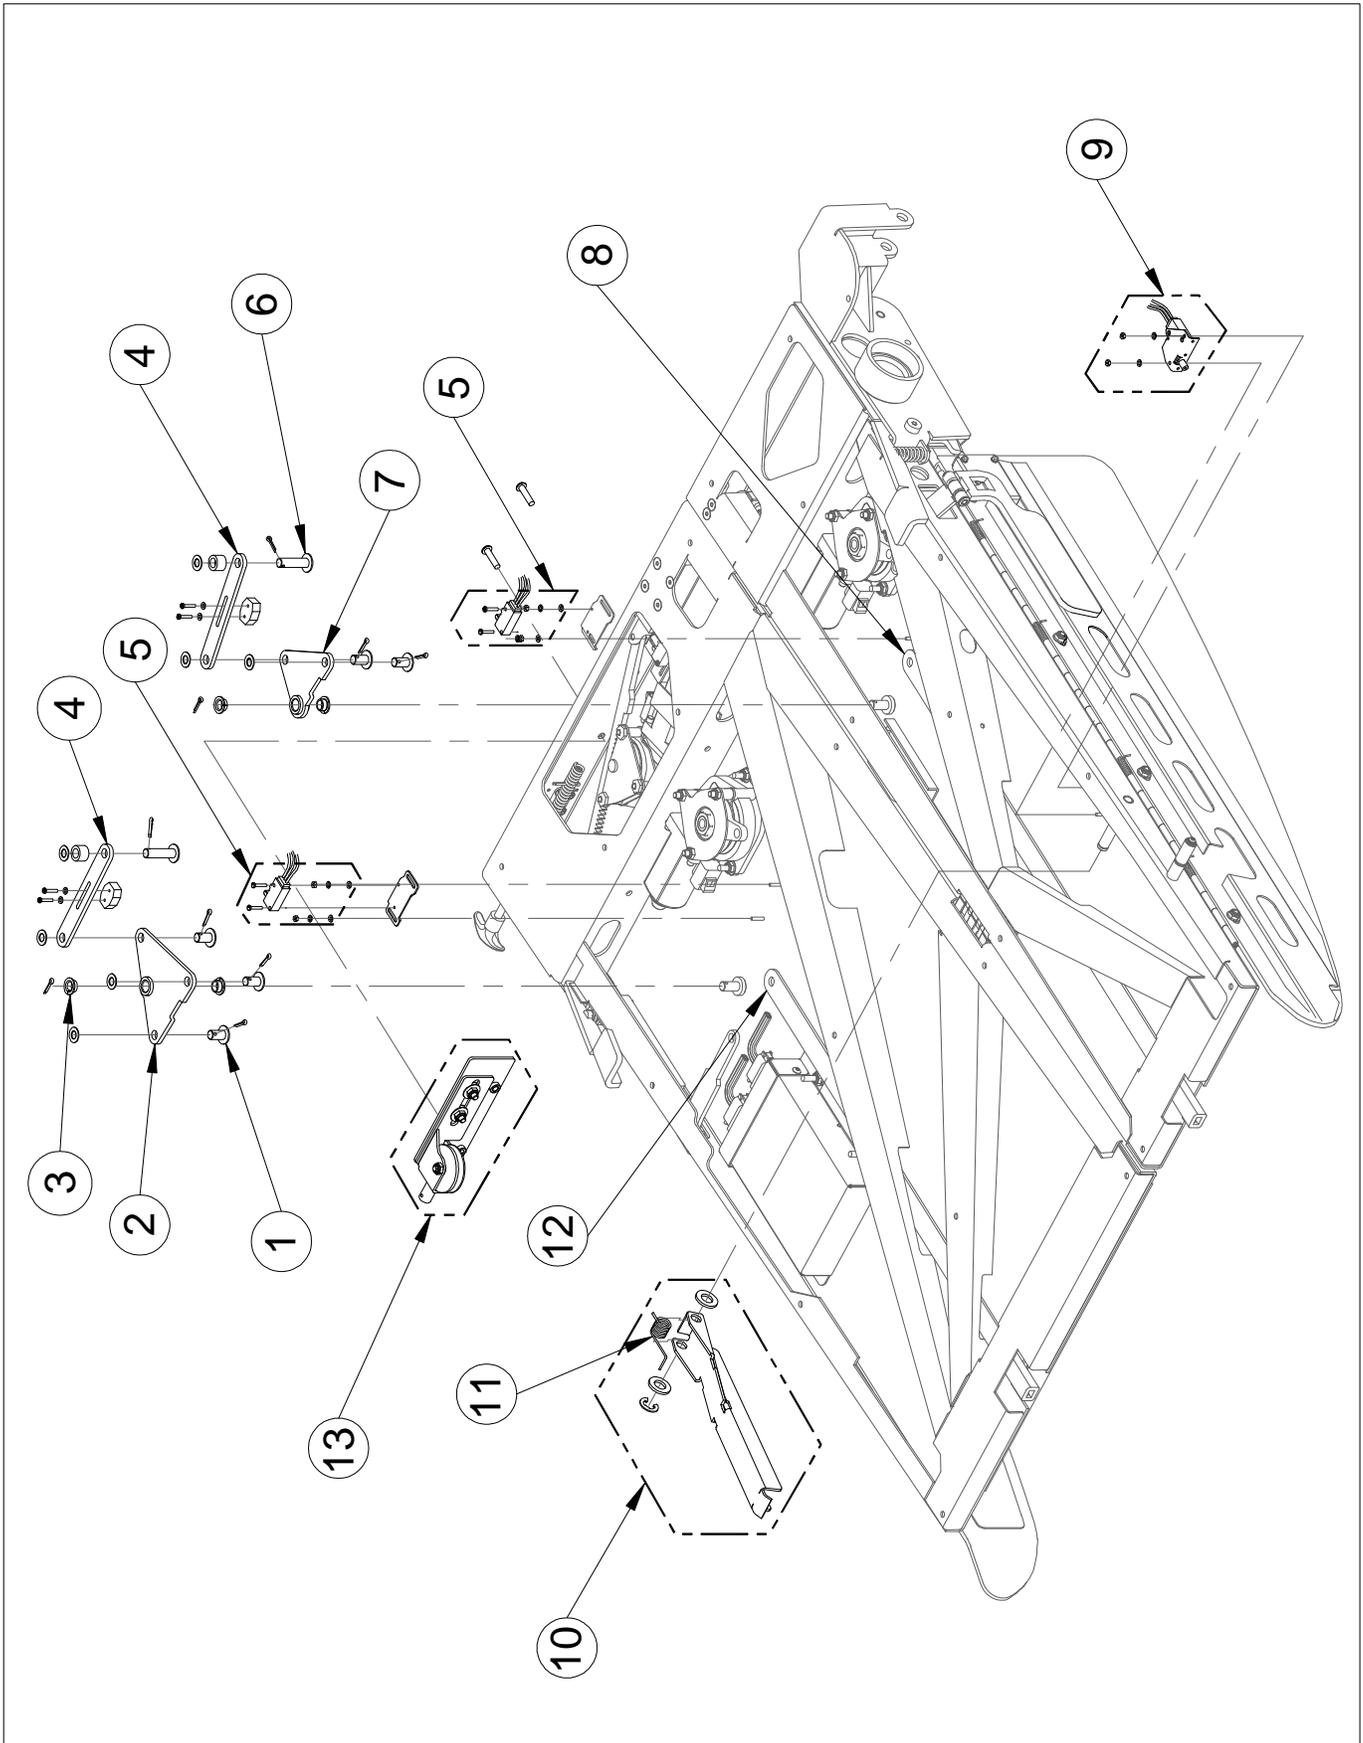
FRONT PLATFORM ASSEMBLY – SHEET 3
